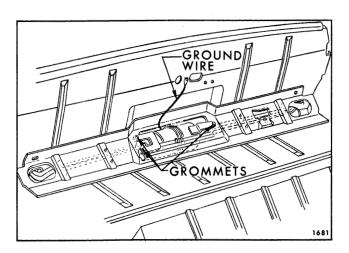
Hydro-Lectric Motor And Pump Assembly
